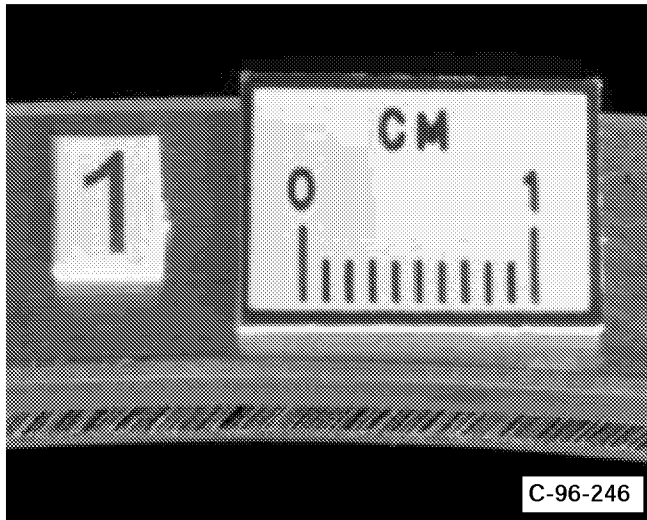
Closeup view of the outer brush seal. Rotor rotation in this view is counterclockwise.
